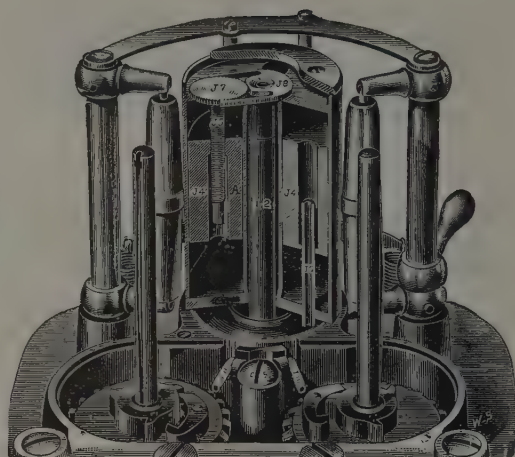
Paper Drum of Boyer Speed Recorder. Chicago Pneumatic Tool Company.
